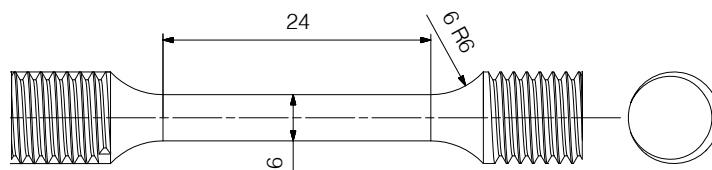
Geometry of tensile specimens. All dimensions are in millimeters.
